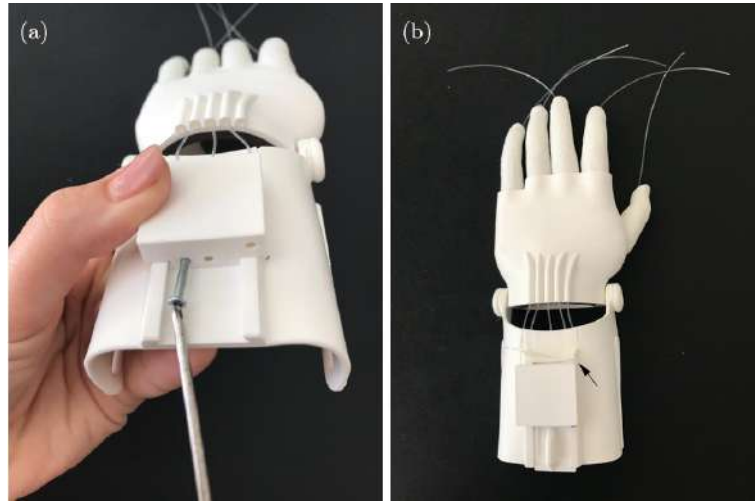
Assembly of the tensioning system of the third prosthesis: (a) fixing the swivel pin with screws to the gripper box after placing the whippletree and the swivel pin inside the gripper box; (b) tying of the thumb to the tensioner pin.
